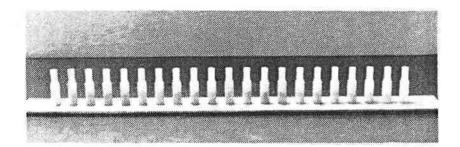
Tool for adjusting 21 nozzles to the same angle.
